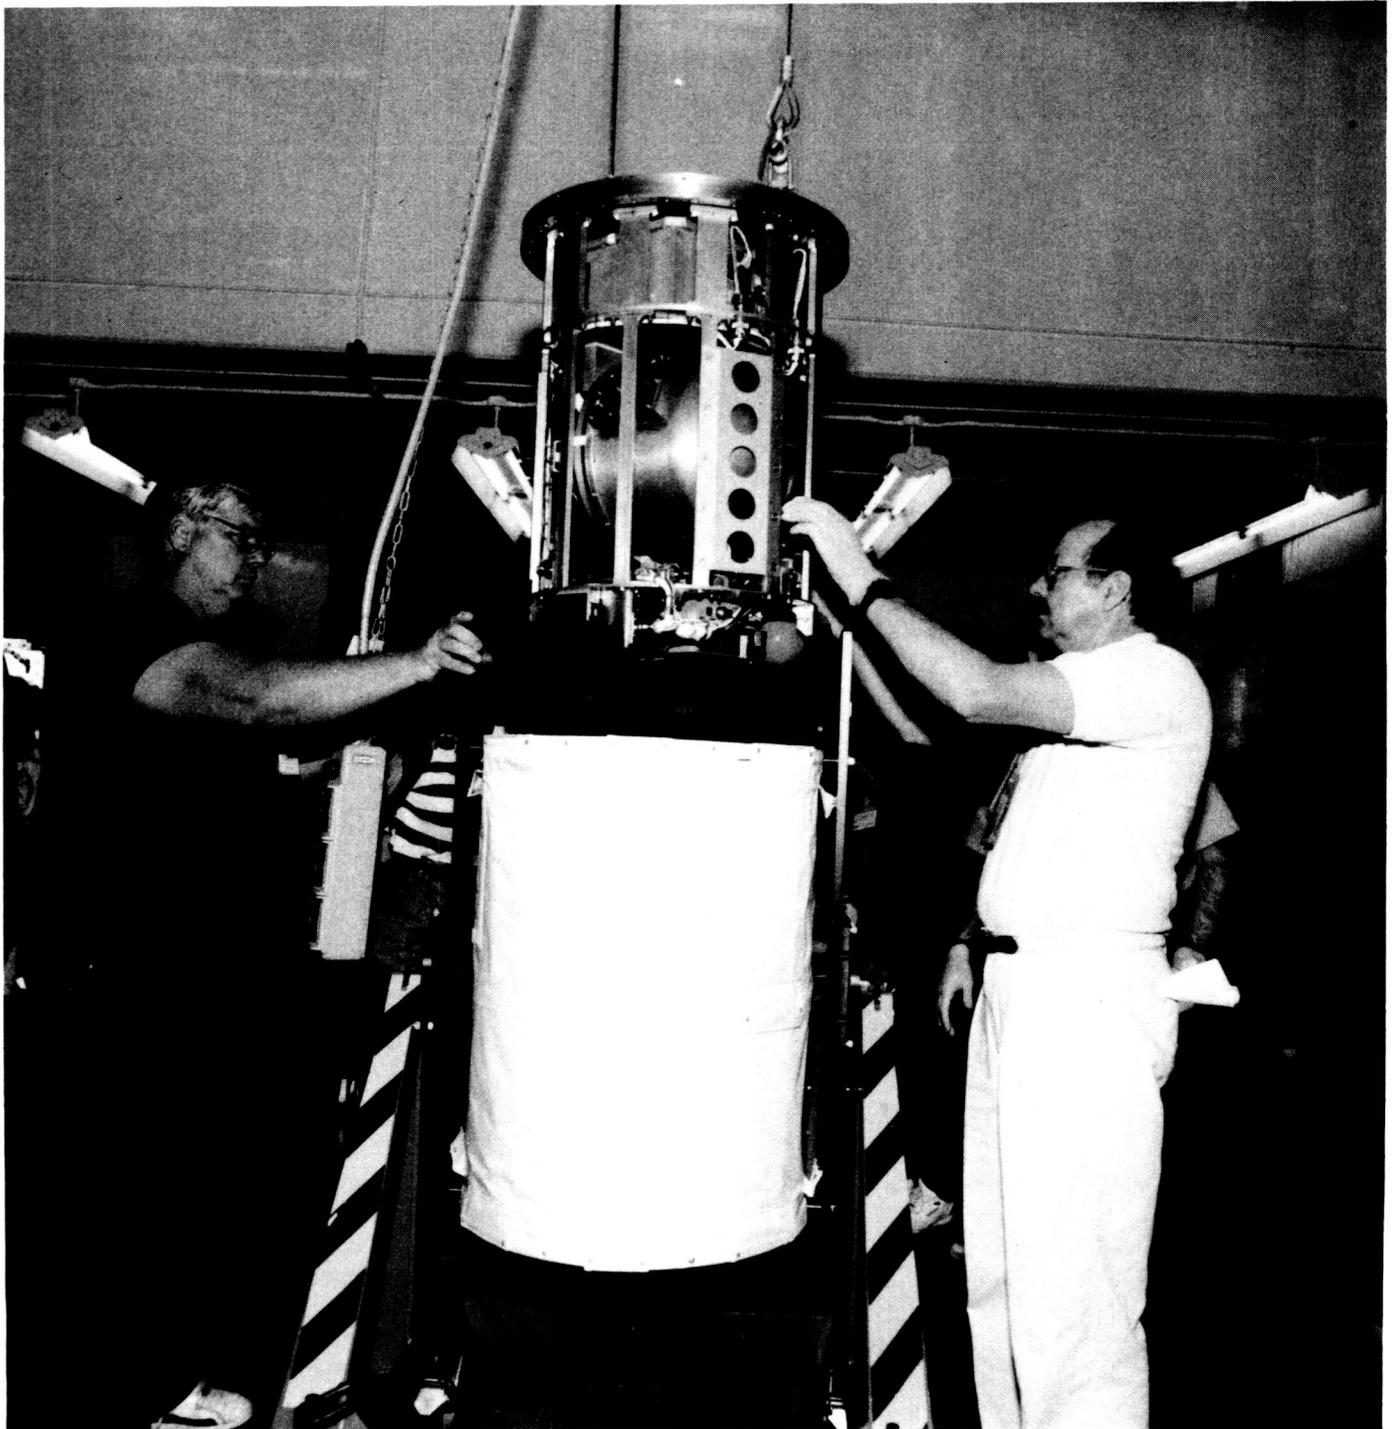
STS-57, G-535 installation into GAS Canister at GAS Facility
